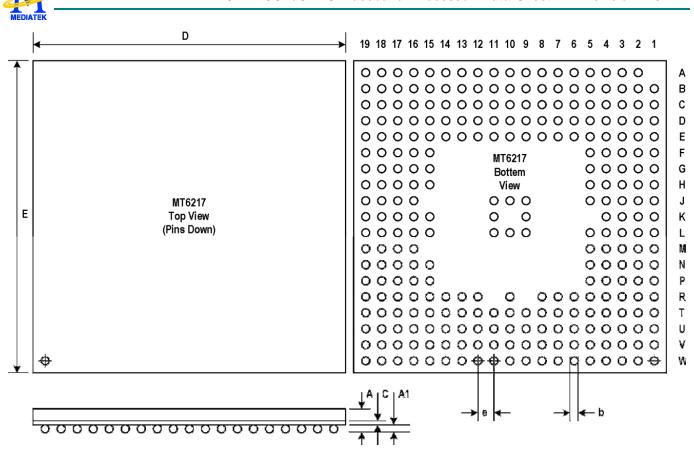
Outlines and Dimension of TFBGA 13 mm\*13 mm, 282-ball, 0.65 mm pitch Package
